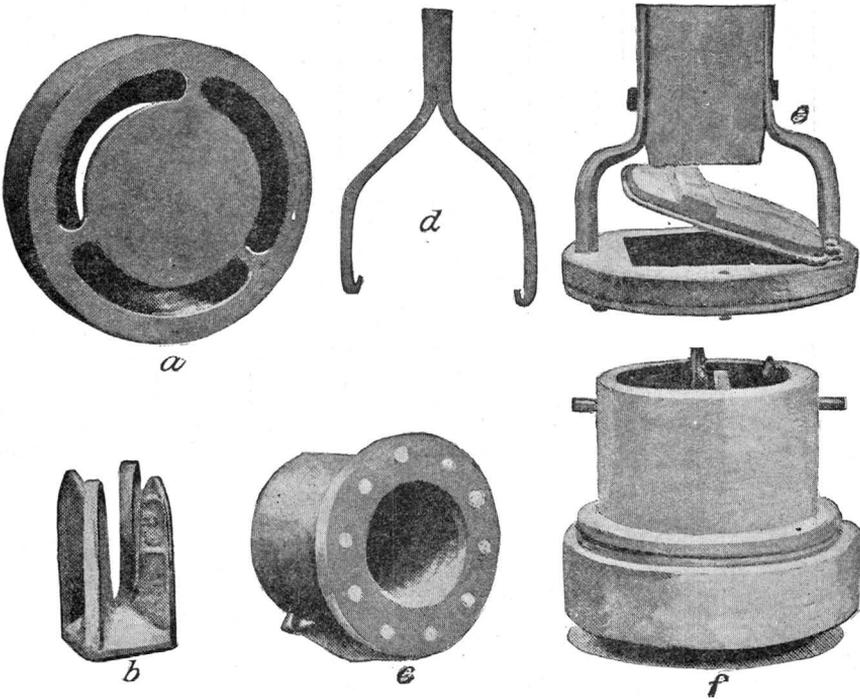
Details of Stone pump: *a*, Lower valve seat; *b*, ring guide to lower valve; *c*, lower or check valve; *d*, hook for removing lower valve; *e*, plunger and valve; *f* is *a*, *b*, and *c* combined.
